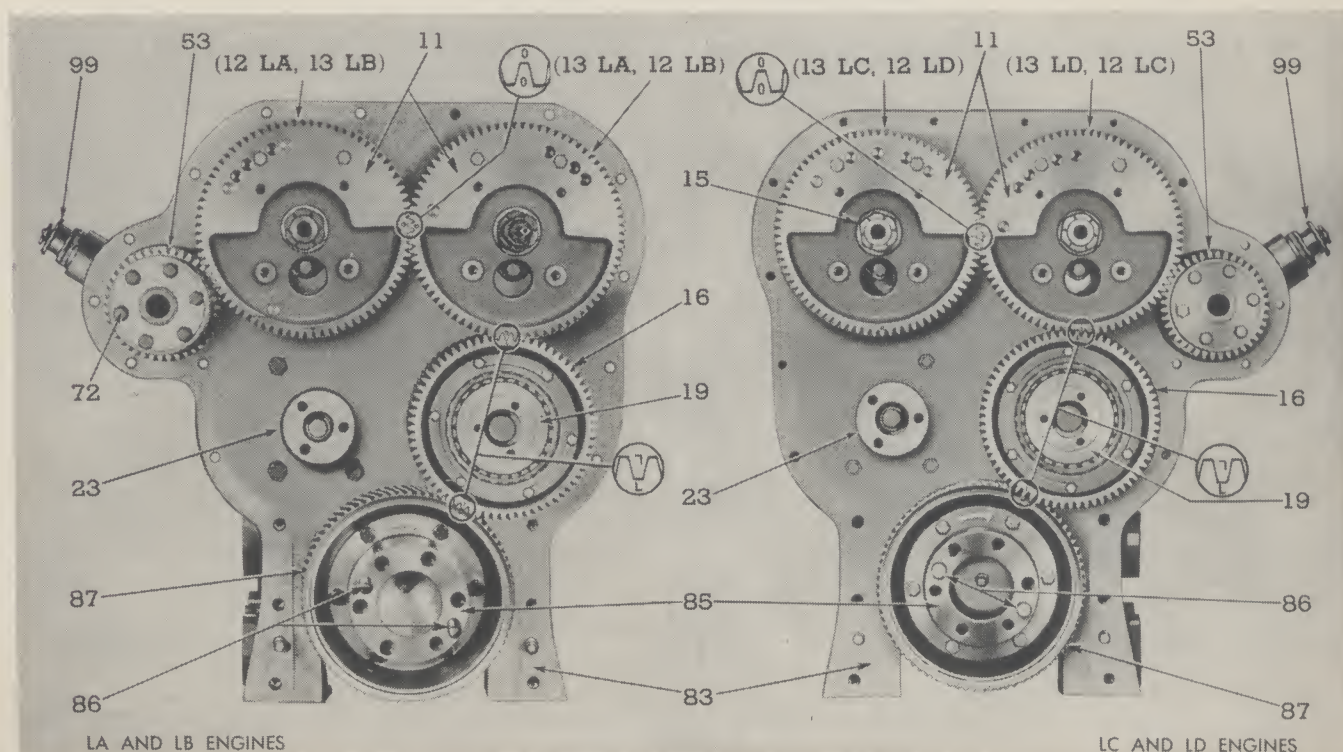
C—A GM engine gear train, located at flywheel end of engine, shows timing marks for LA and LB engines. Oliver tractors are equipped with the RB engine which is shown in Fig. 0512A. Refer to Fig. 0512A for legend.
